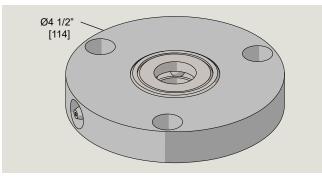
Surface mounted floor pivot bearing assembly RS3423-010
